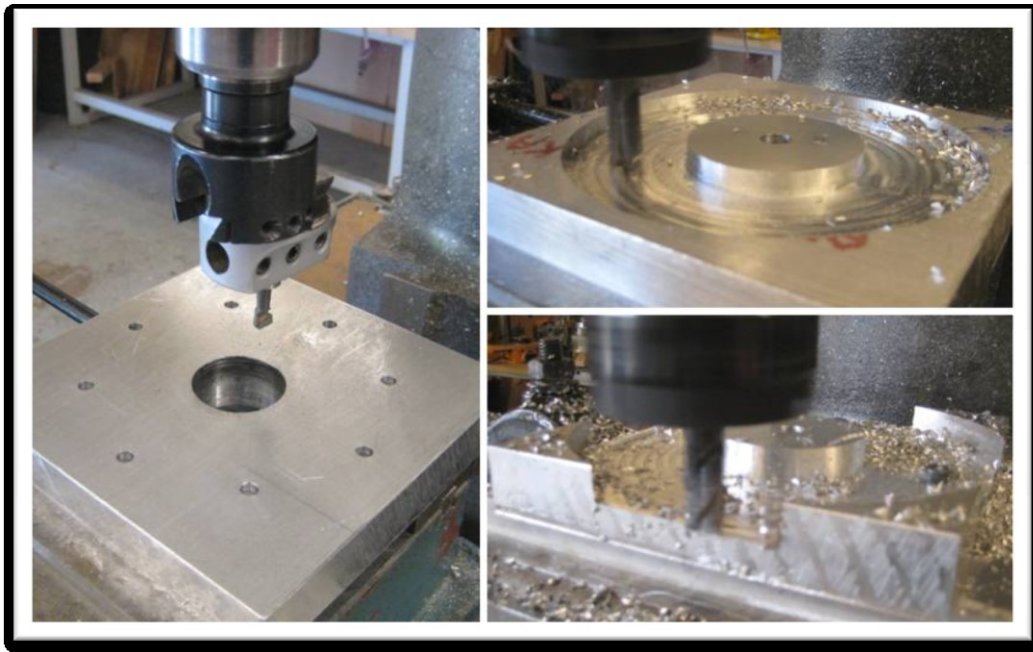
Collage of plate machining on CNC Mill at Arizona State University student machine shop.
